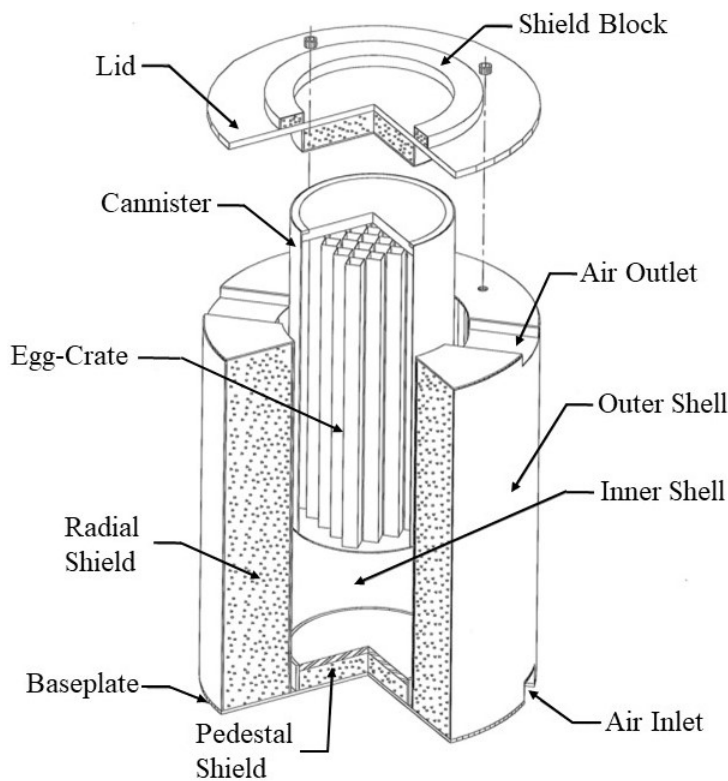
Example of a free-standing upright design of a dry storage cask with air inlets and outlets [3]
